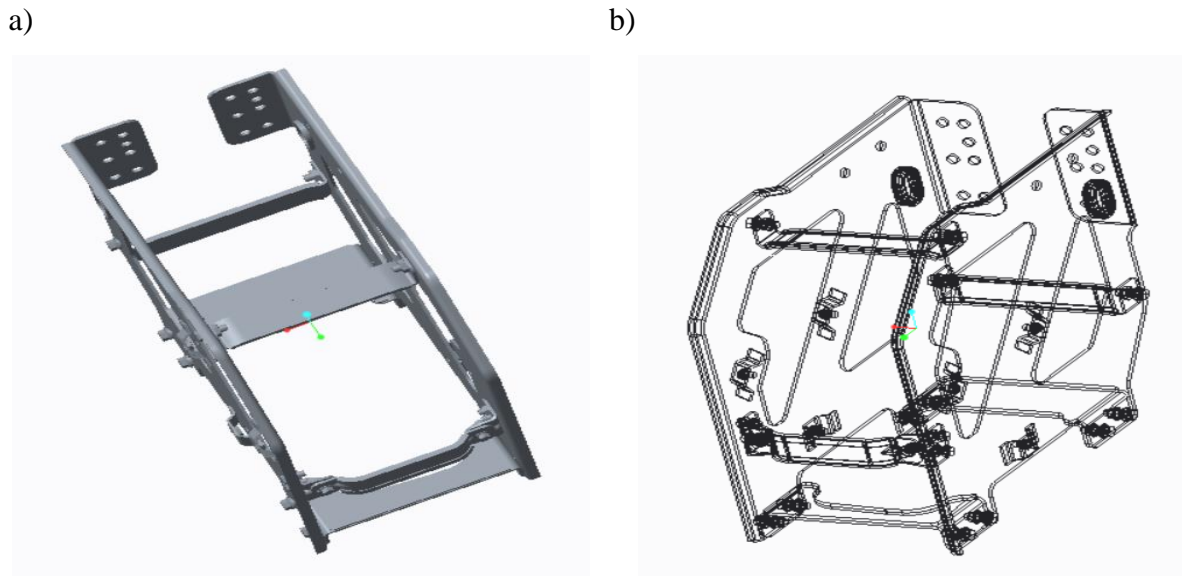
(a) Urea tank mounting bracket assembly (b) Wireframe Model
